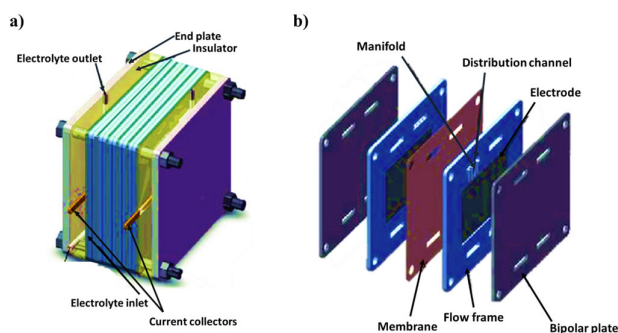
(a) Scheme of the five-cell VRFB stack; (b) exploded view of a single cell VRFB.
